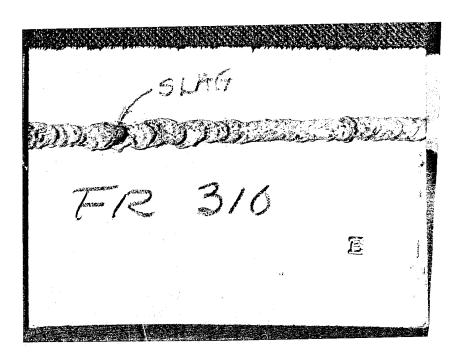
\underline{7}$ Weld sample - 310 type filler rod, butt weld
